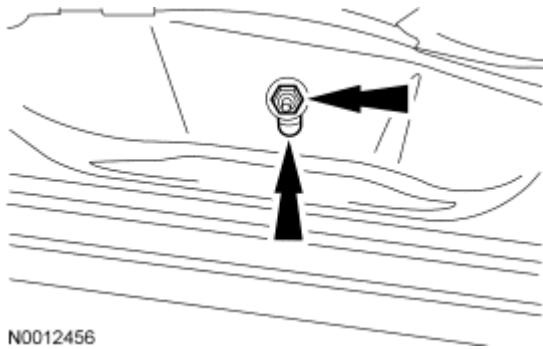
Locating Front Window Regulator Guide Rail Lock Nut
